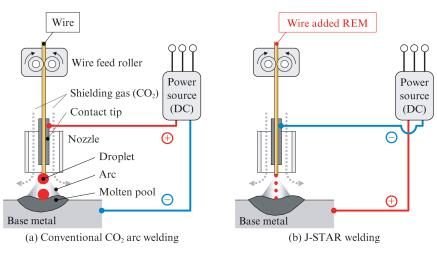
Comparison between conventional CO₂ arc welding and "J-STAR™ welding"
